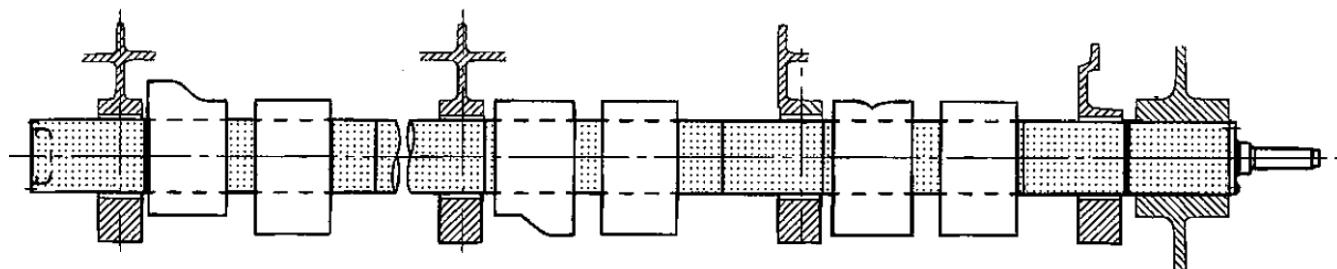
Camshaft of the 6DKRN 80/230 engine
